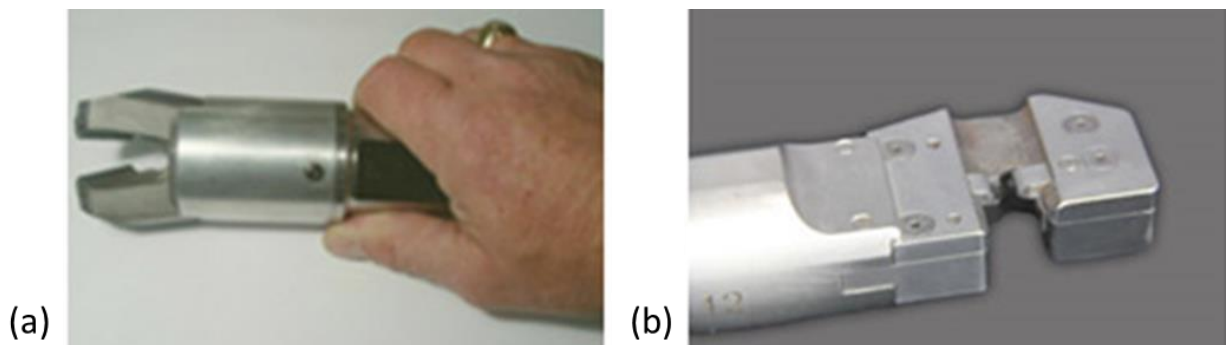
Photographs of (a) a scissor style, 45 deg angled jaw handset and (b) a C-style with parallel action jaw handset [75].
